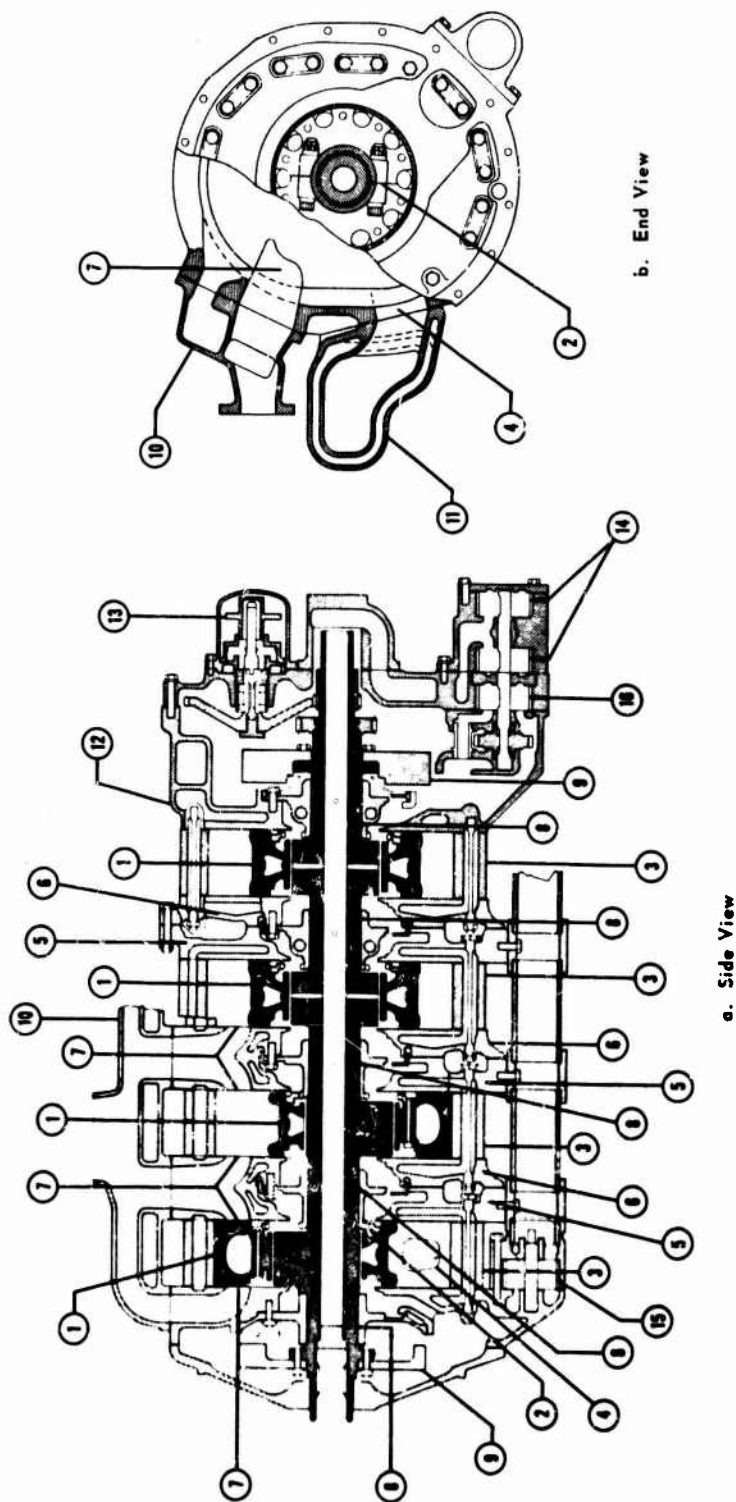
Rotary-Piston Engine Configuration, 4-Rotor Engine
